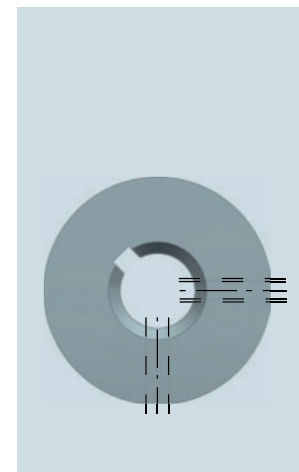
Top view of workpiece with longitudinal groove and cross bores into main bore
